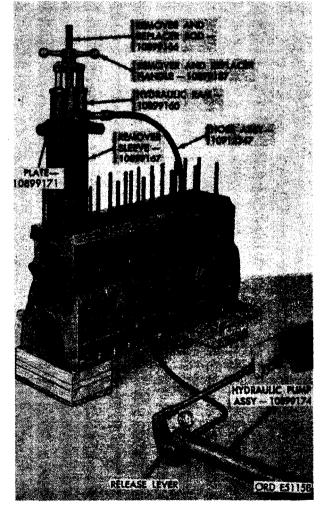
REMOVING NO. 1 CYLINDER LINER.
